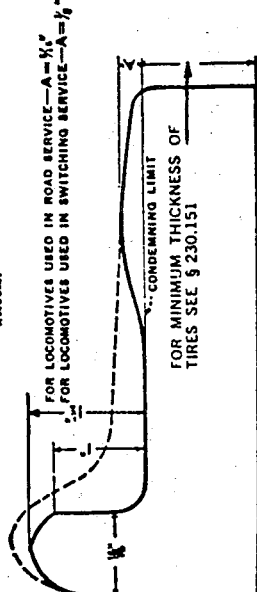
Steel tire. Shrinkage fastening. Driving and tralling wheels.
